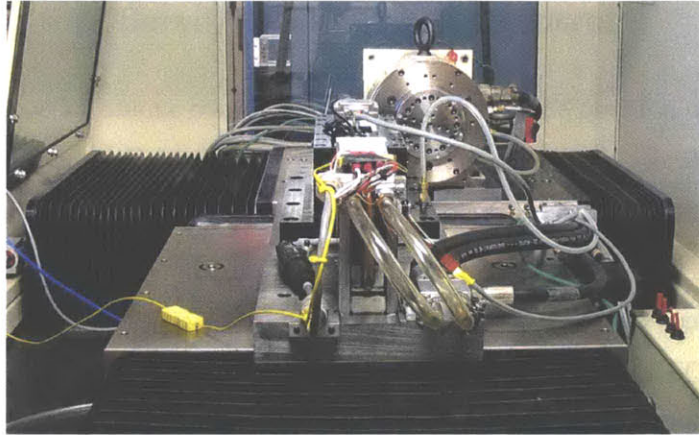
Rear view photo the prototype linear fast tool servo mounted on the Moore Nanotechnologies machine base.
